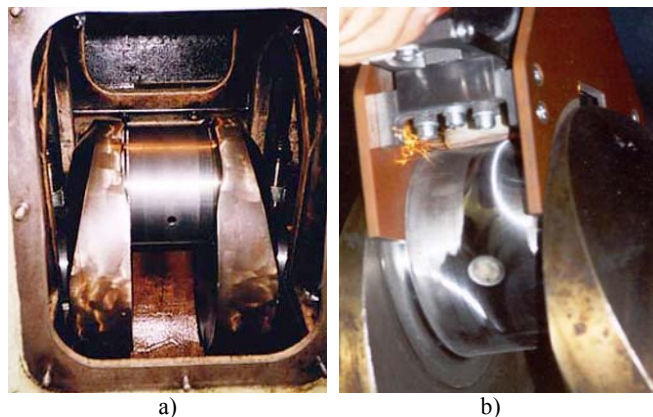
a) Middle size crankshaft placement in the engine housing; b) In-situ crankshafts grinding device in work
